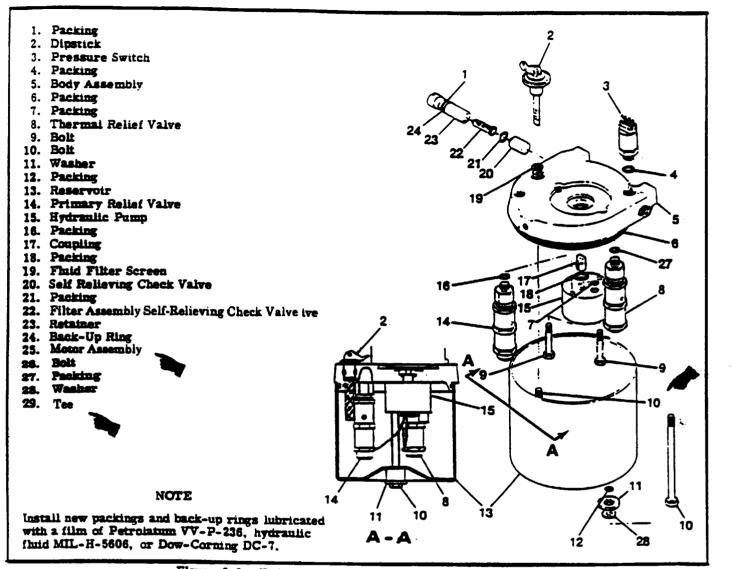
Hydraulic Power Pack Assembly (Sheet 1 of 2)
